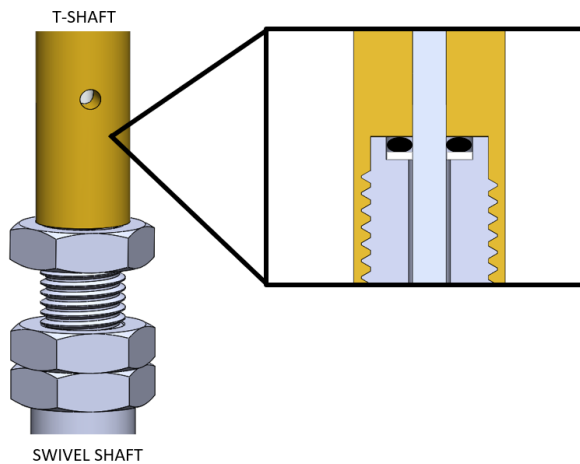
T-shaft and swivel shaft connection with O-ring and Teflon disk.
